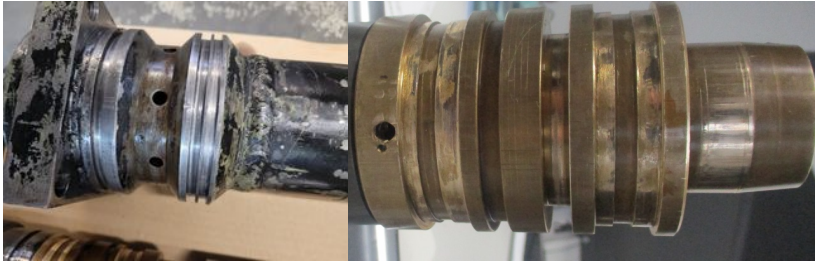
Cylinder hose with holes for hydraulic oil supply and cylinder piston.
